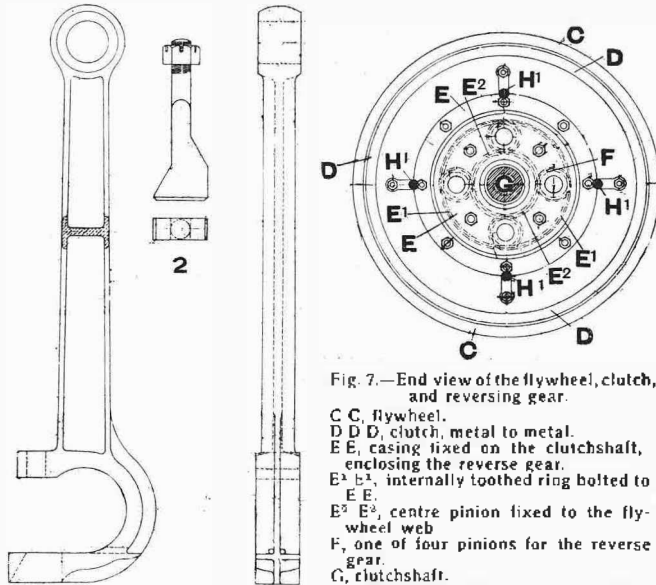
End view of the flywheel, clutch, and reversing gear.
